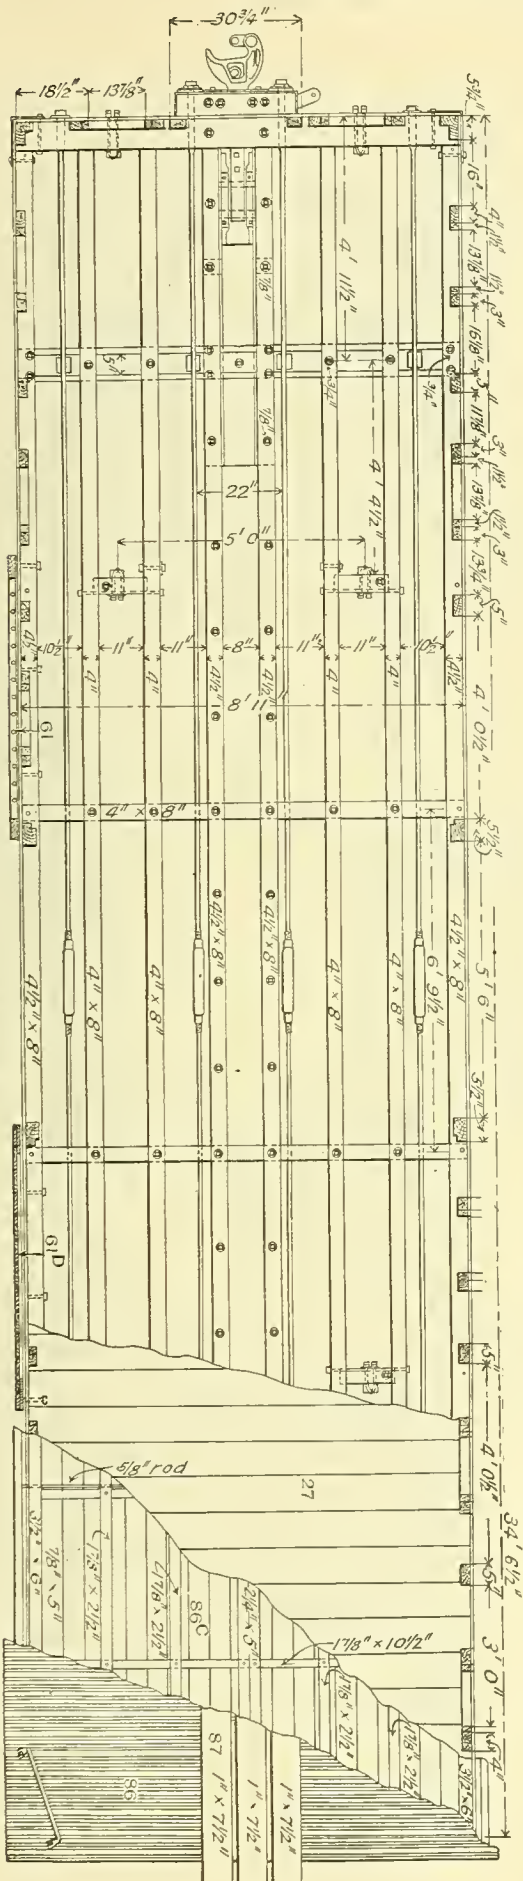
Half Longitudinal Section and Elevation of Side Trimming.
